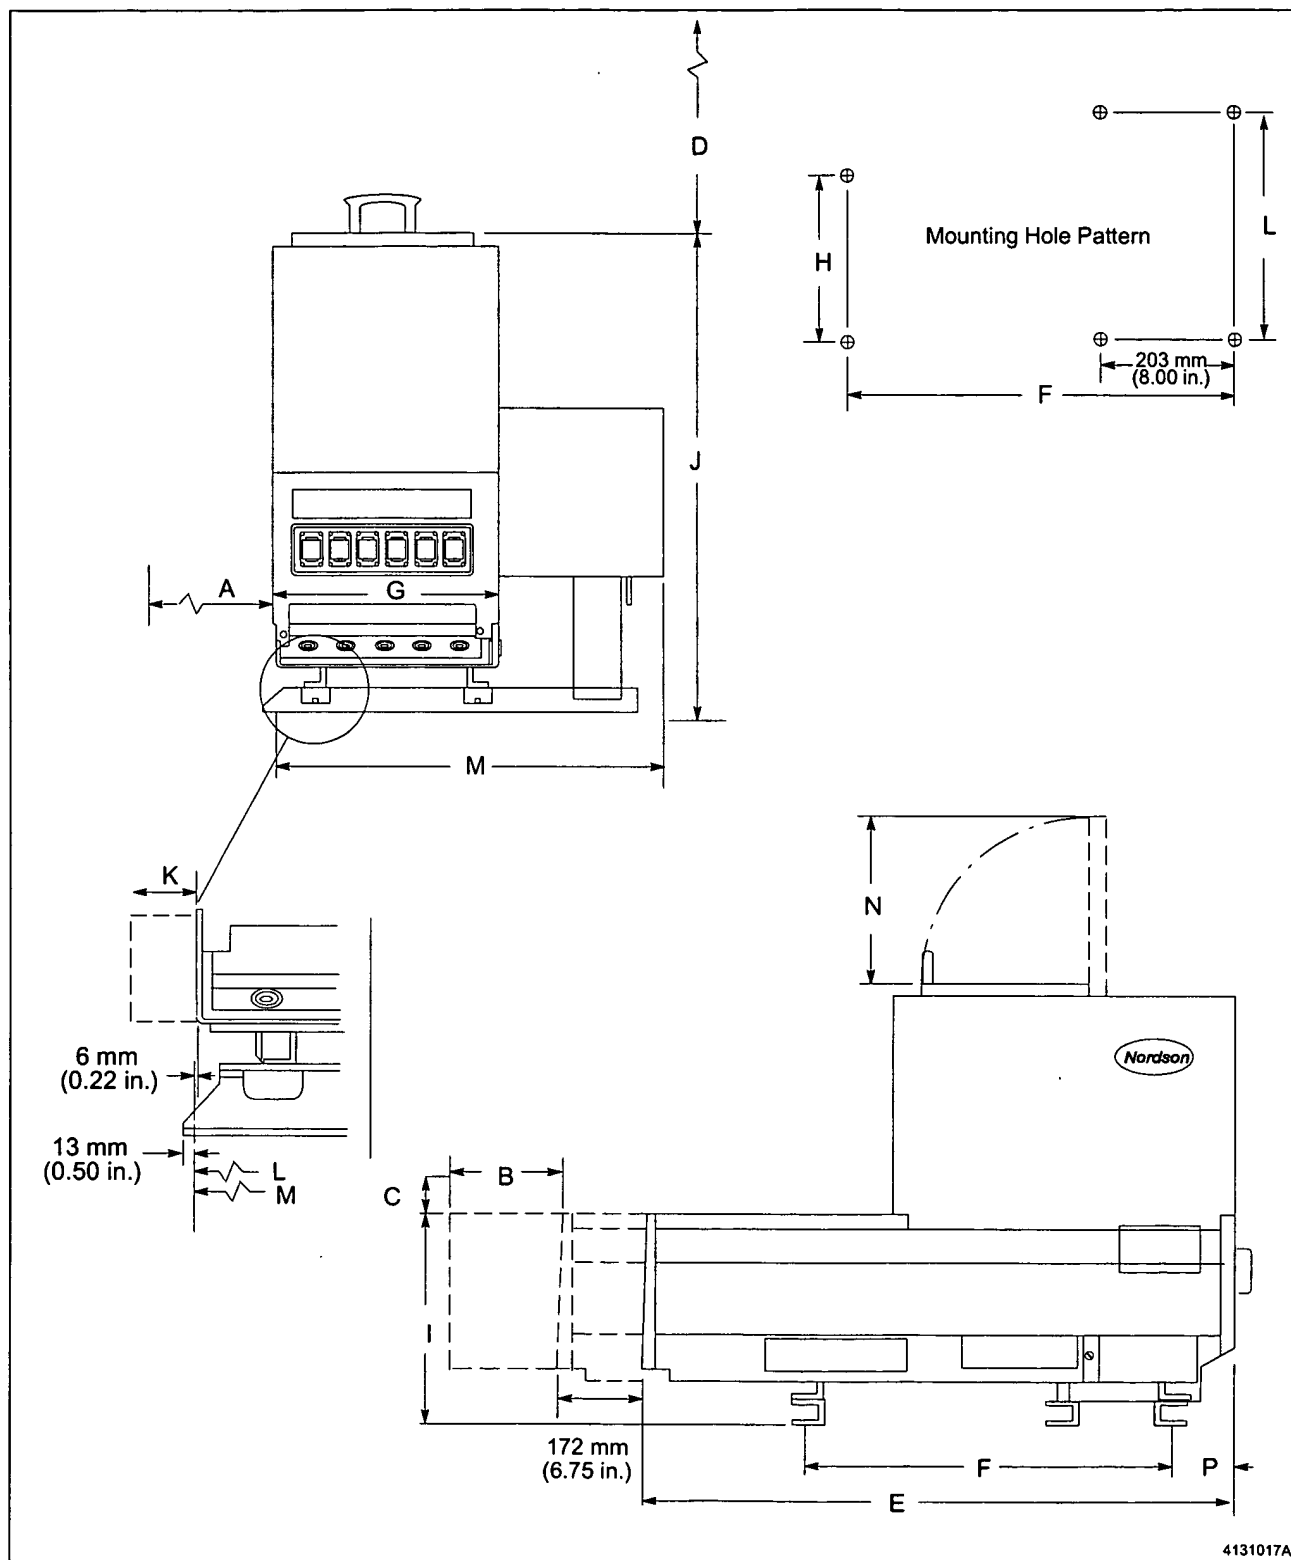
Series 3960 DC Gear Pump Melters
